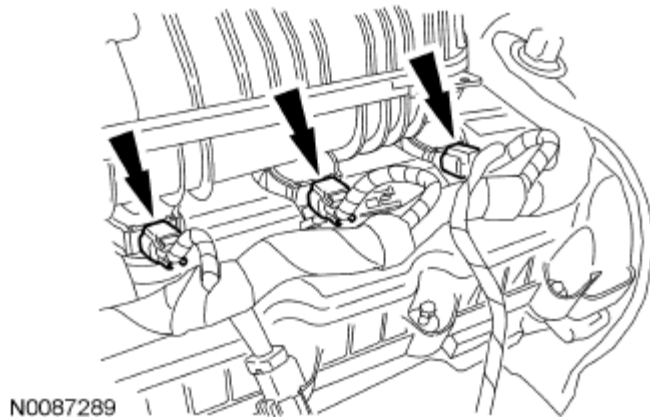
Locating RH Coil-On-Plug Electrical Connectors
